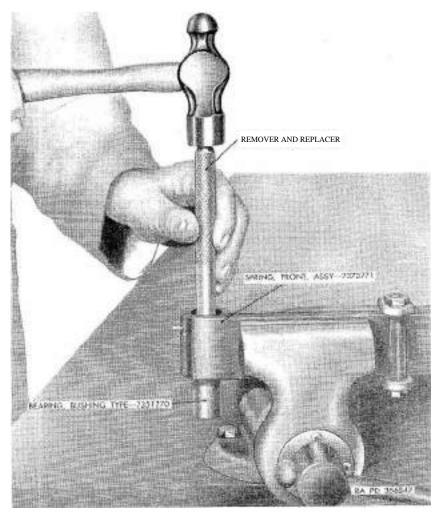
Removing hushing-type hearing from spring with a bushing 'remover and replacer.
